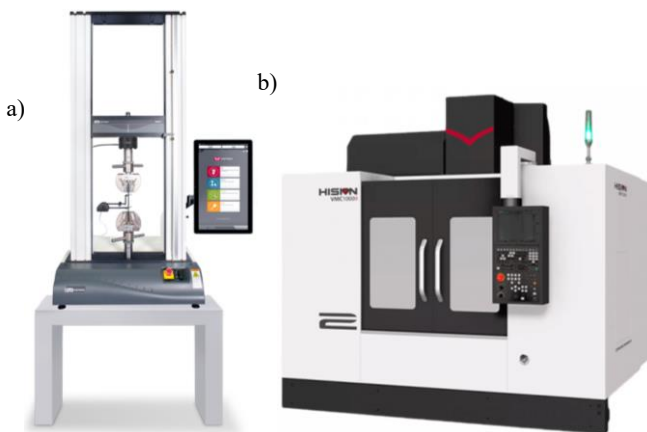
a) Universal tensile test machine, b) FSSW machine (CNC).
